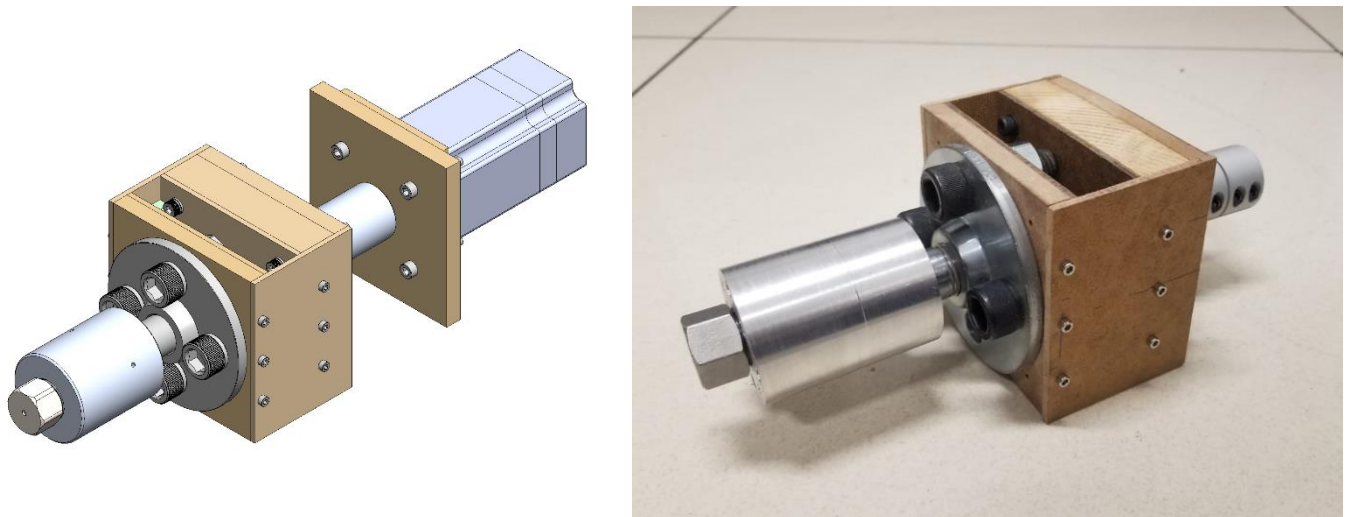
Orthographic view of filament extruder assembly in CAD (Left) and after assembly (Right).
